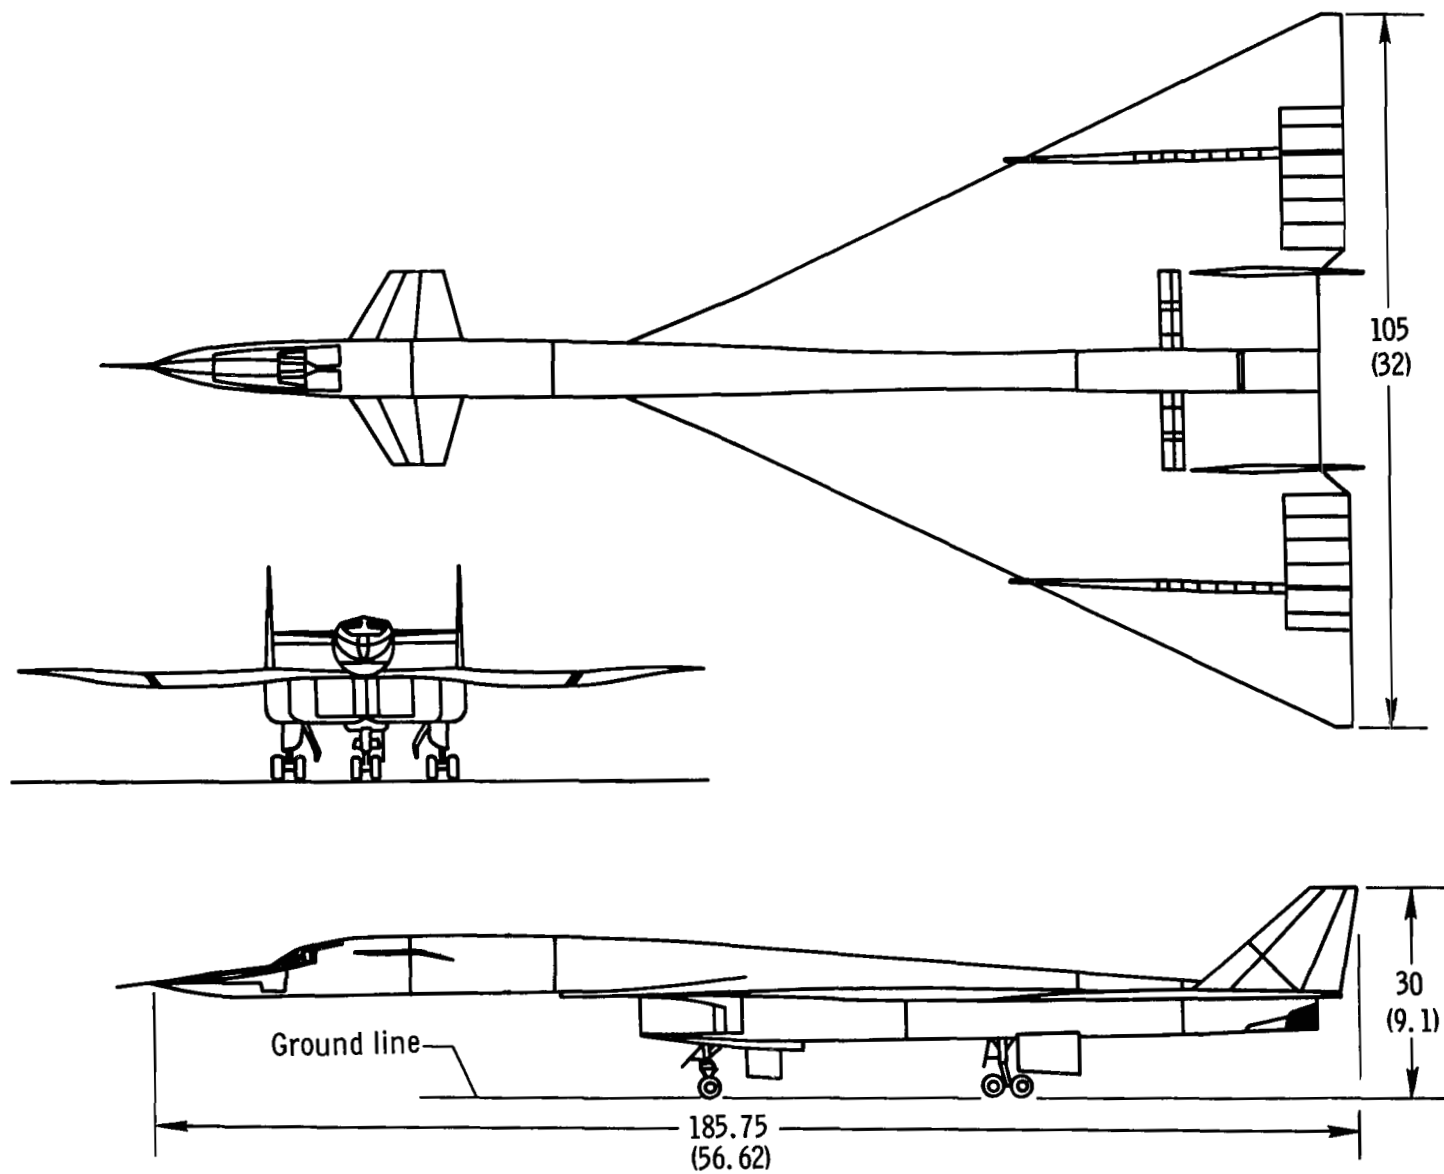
Three-view drawing of the XB-70 airplane. Dimensions in feet (meters).
